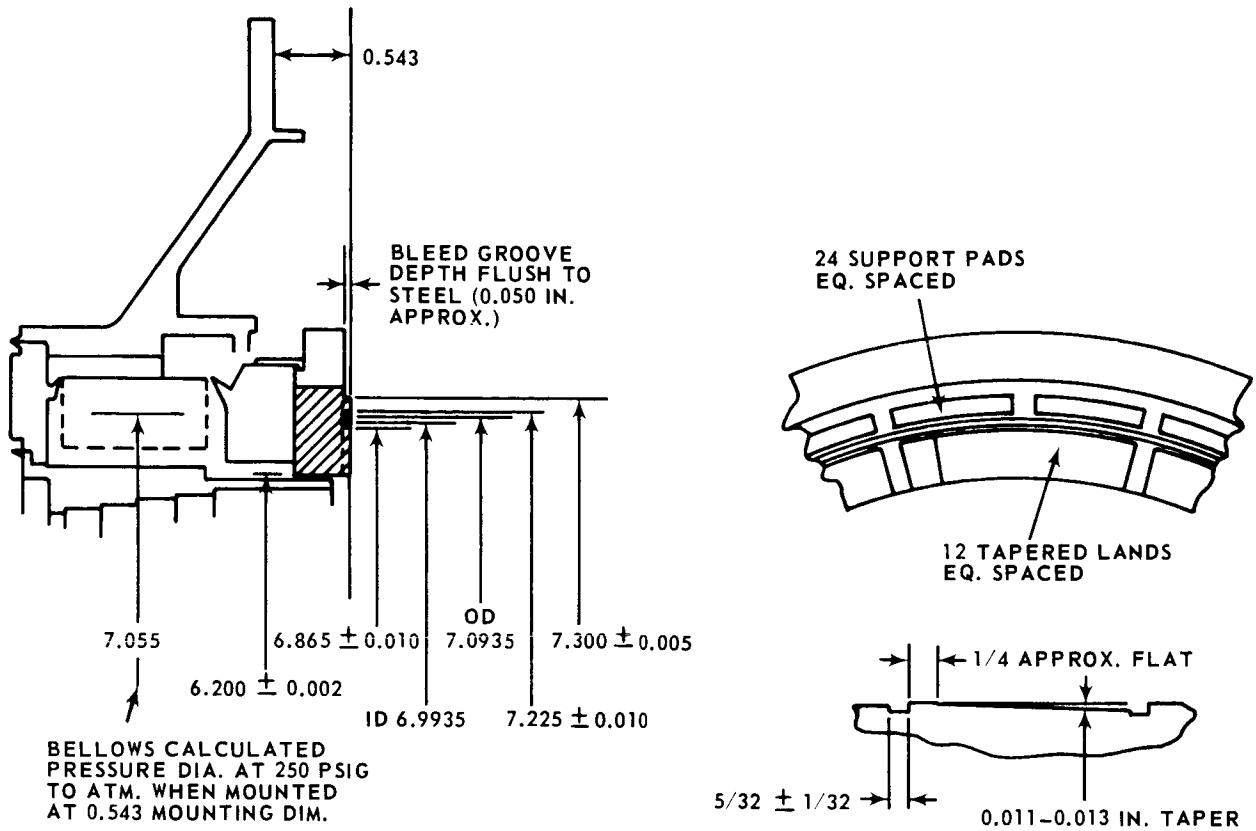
Build 1 of the Rubbing-Contact Hydrodynamic Pad Face Seal with Bellows Secondary Seal
